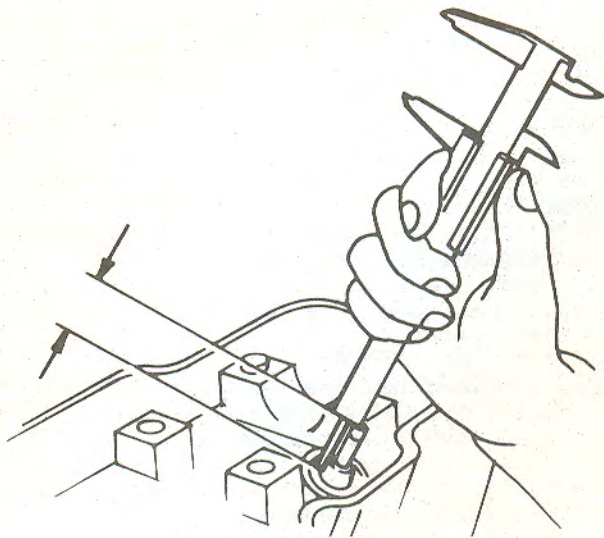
Measure the length of the protruding end of the valve stem to check whether washers are required under the valve springs or the cylinder head must be replaced.
